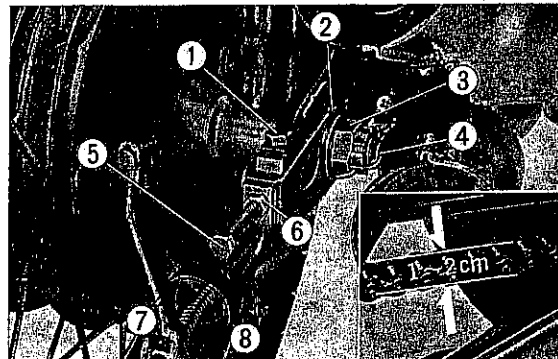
① Fork cap bolt ⑤ Adjusting bolt
